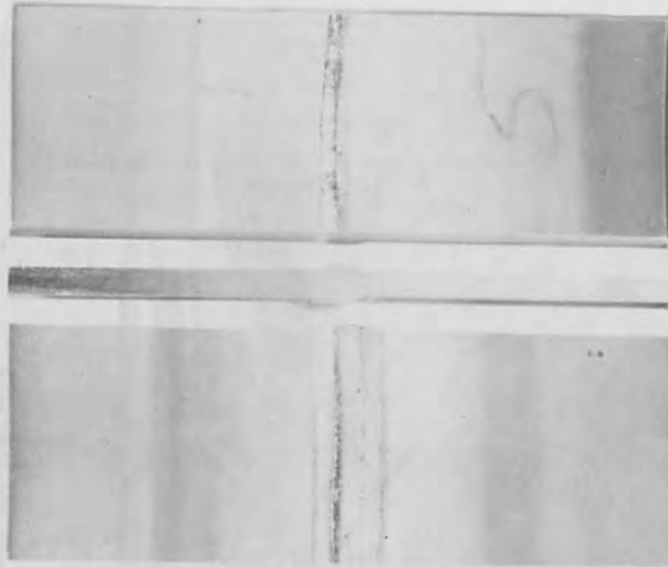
Weld Sample Coupons from 4-in. dia x 1/8-in. wall SS Pipe.
